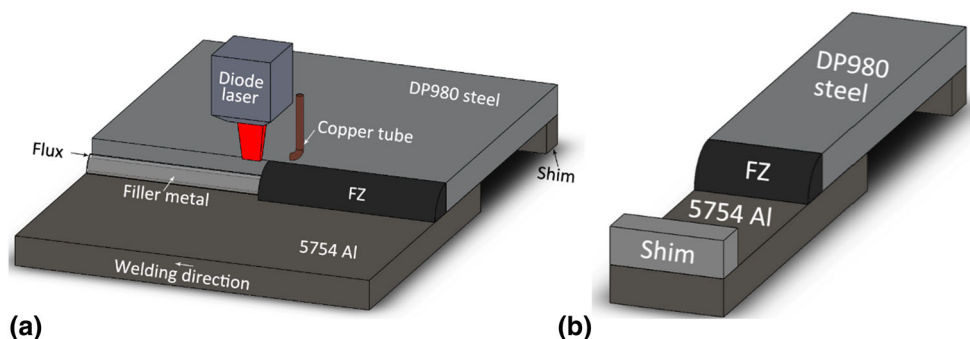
Schematic description of (a) set up used in laser welding/brazing, and (b) tensile-shear test sample
